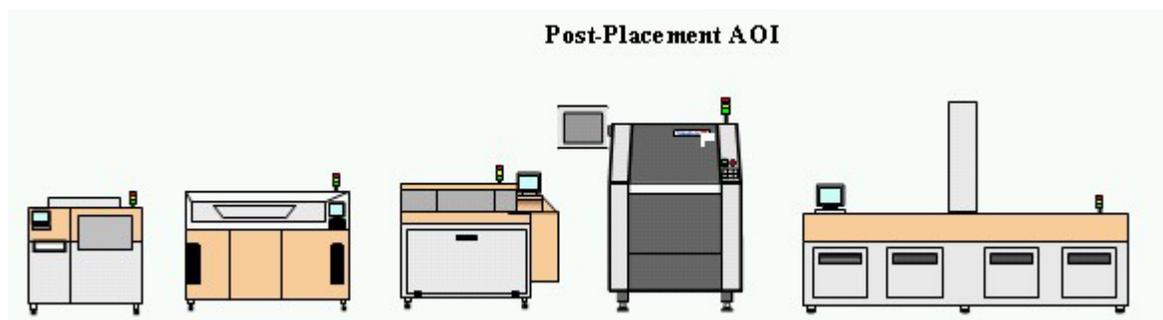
Inline Process Control. Solder Joint Inspection would Require Further Investment in Post-reflow AOI
